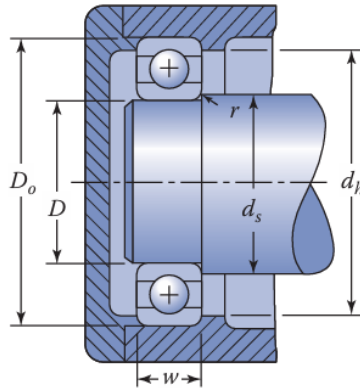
6: Dimensions of ball bearing, shaft, and housing
